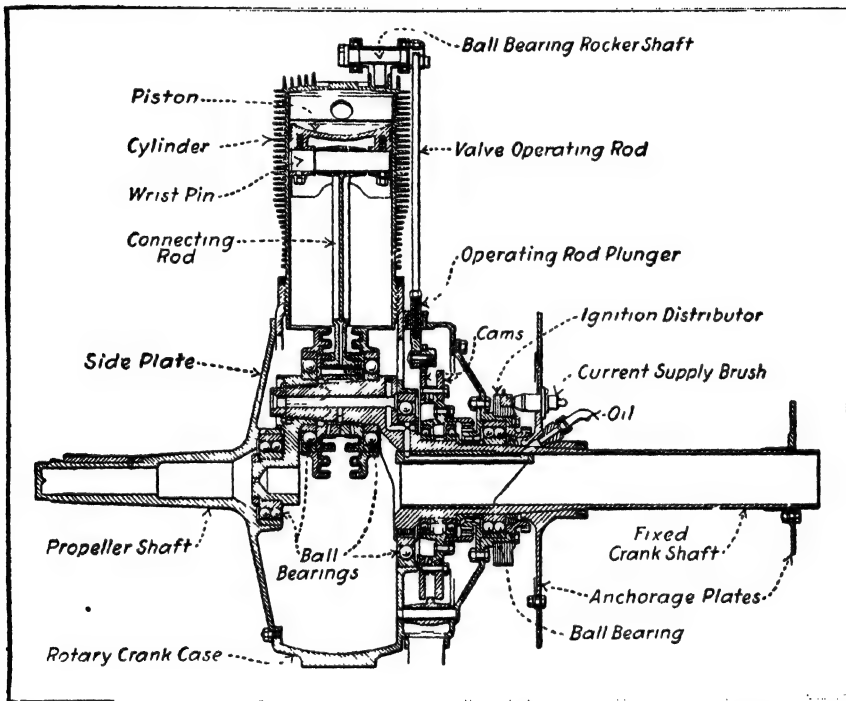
Side Sectional View of the LeRhône Fixed Crankshaft, Aviation Engine.
